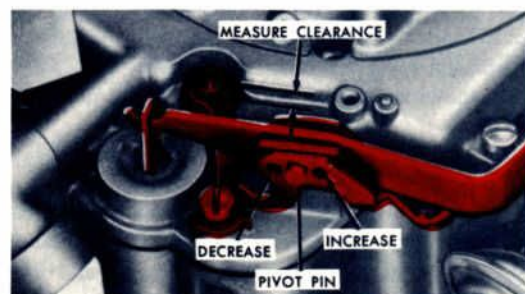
Accelerating Pump Stroke Adjustment and External Vent Valve Clearance
